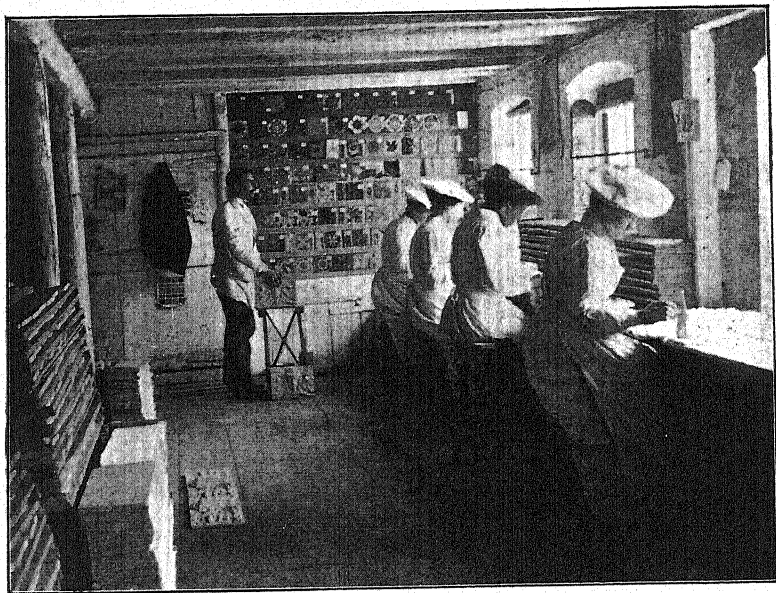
Decorating. (See "*Interesting Notes on Ornamental Tile Manufacture*," p. 13, Carter & Co., Poole.)
